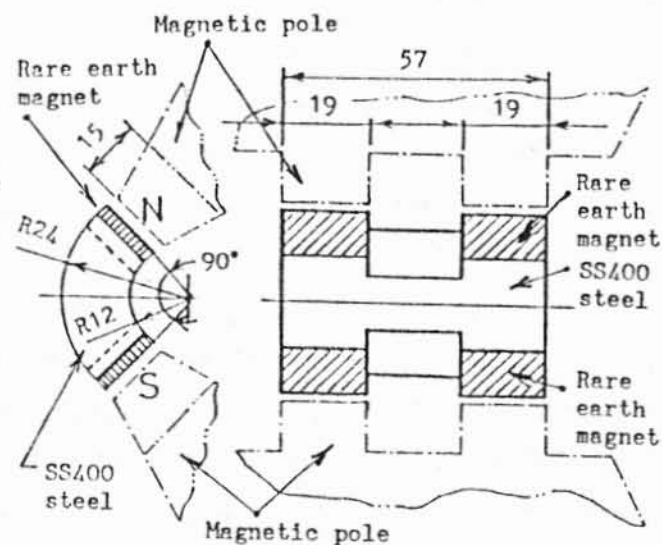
Shape and size of magnetic finishing jig [Shinmura et al, 1993]
